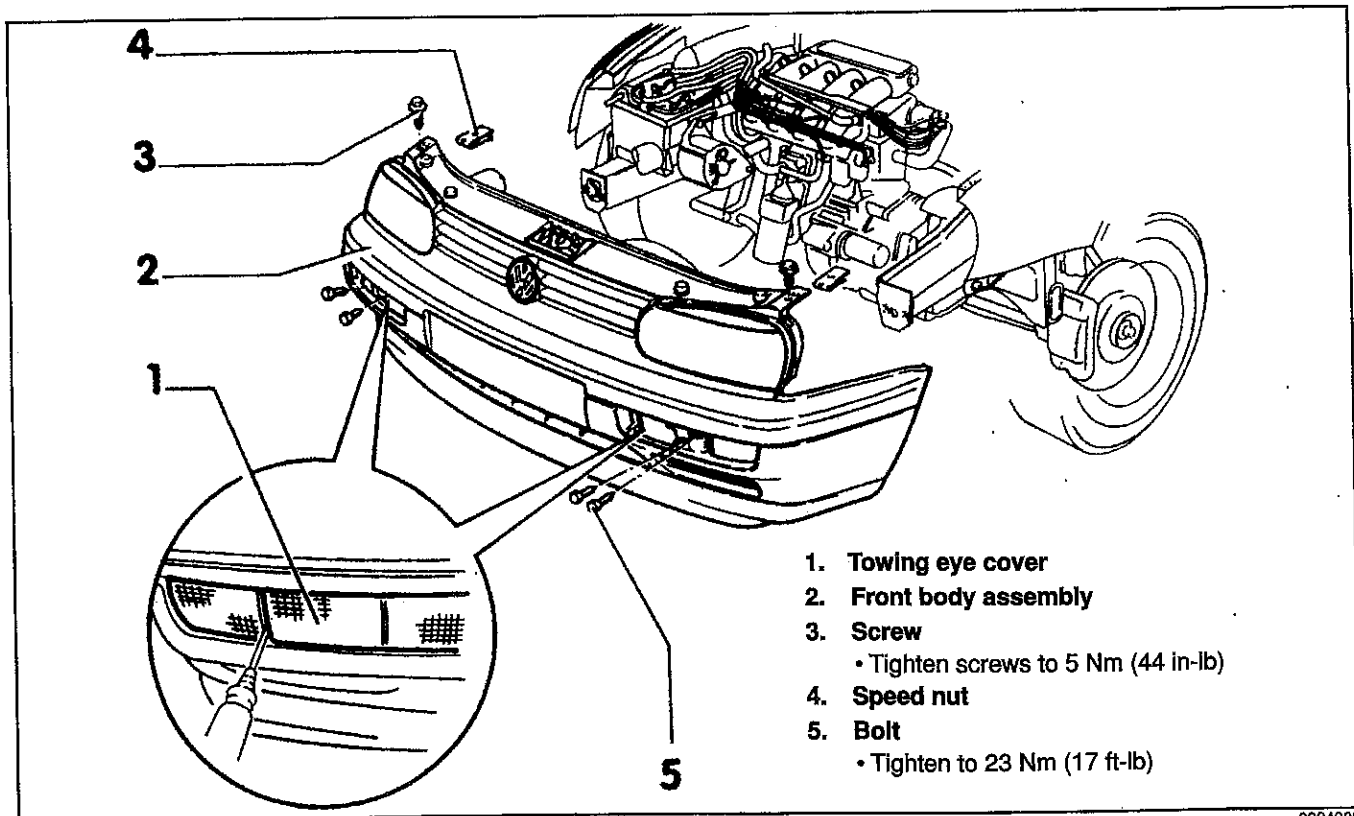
Front body assembly. Be sure to remove lower screws from wheel housing trim (not shown).
